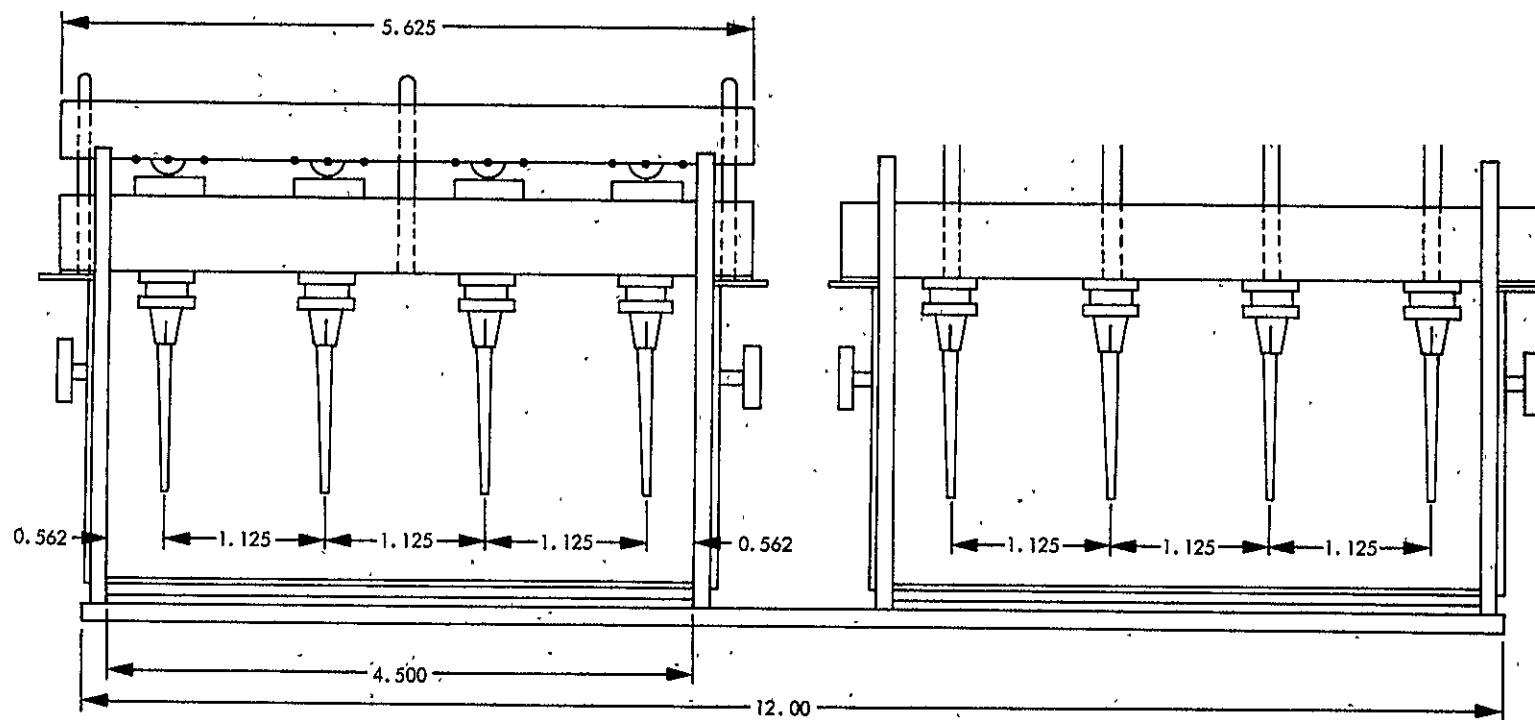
Needle Positions of Fluid Dispenser Side View
